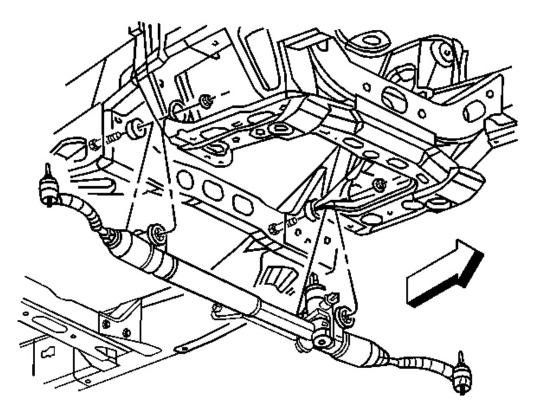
View Of Power Steering Gear & Bolts Courtesy of GENERAL MOTORS CORP.
